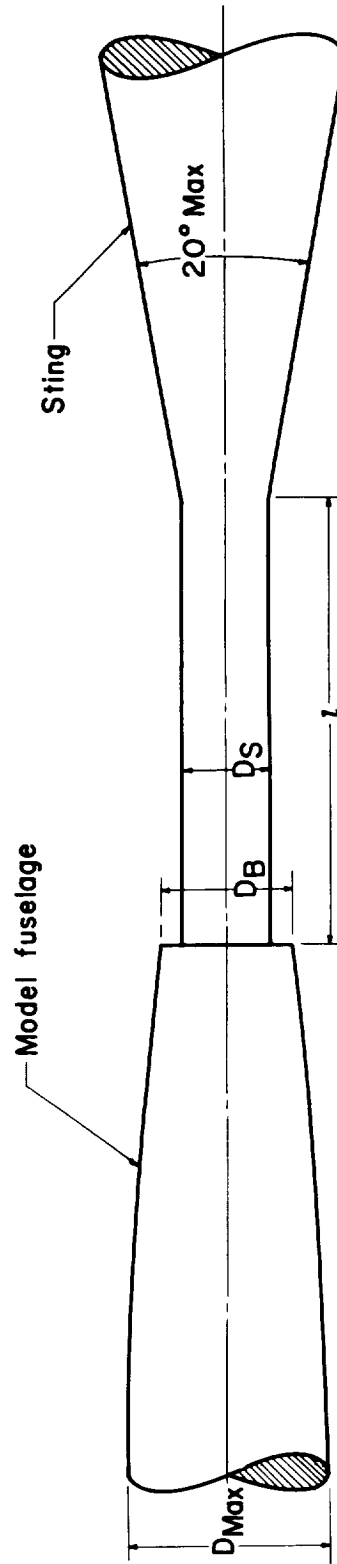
Details of sting at the model, Langley Unitary Plan Wind Tunnel.
